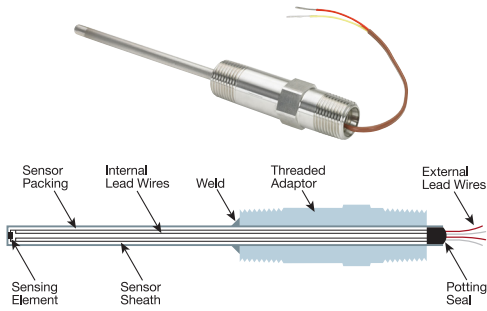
General Purpose Welded Adapter Style
